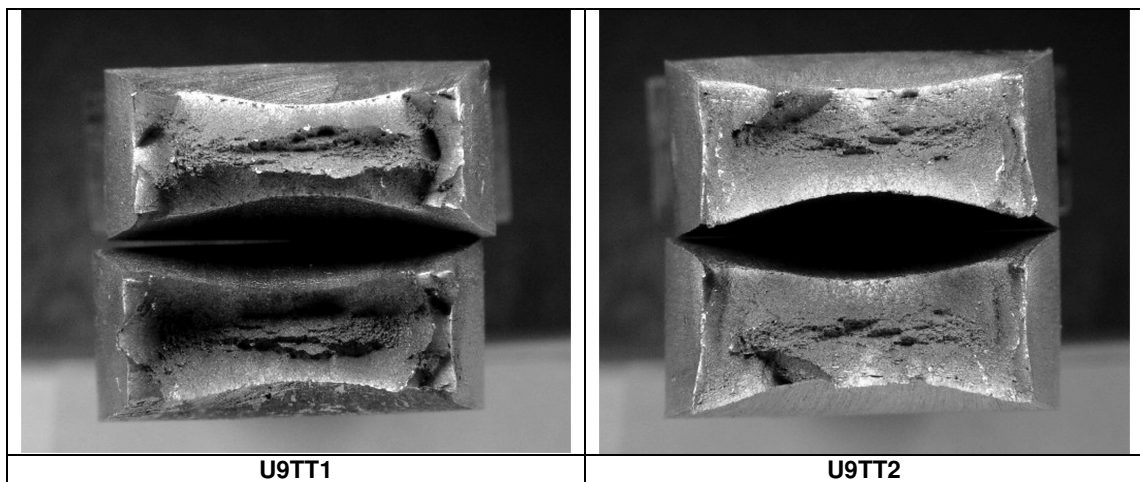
Fractographs of U9TT1 and U9TT2 specimens.
